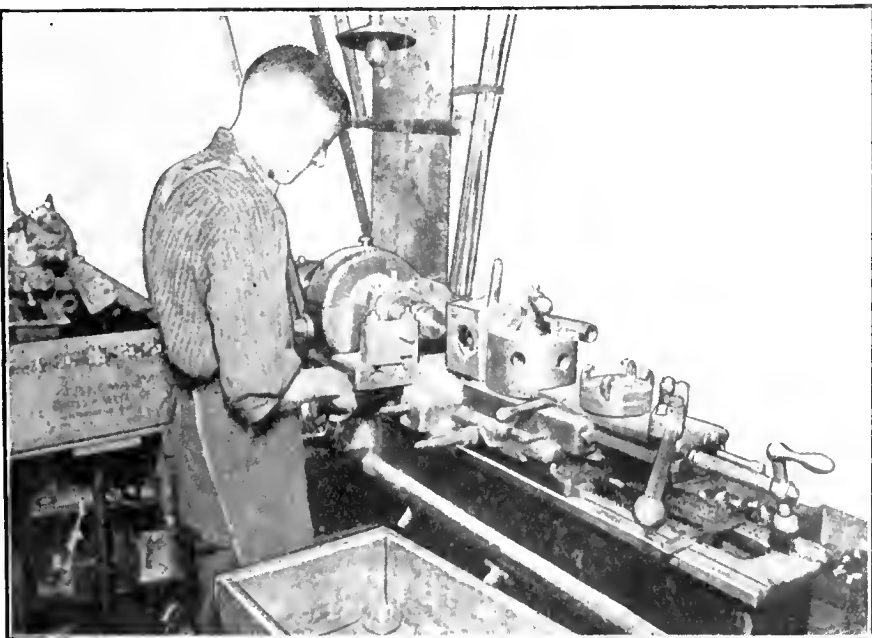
FINISHING FUSE SOCKETS ON A "WARNER & SWASEY" TURRET LATHE.
